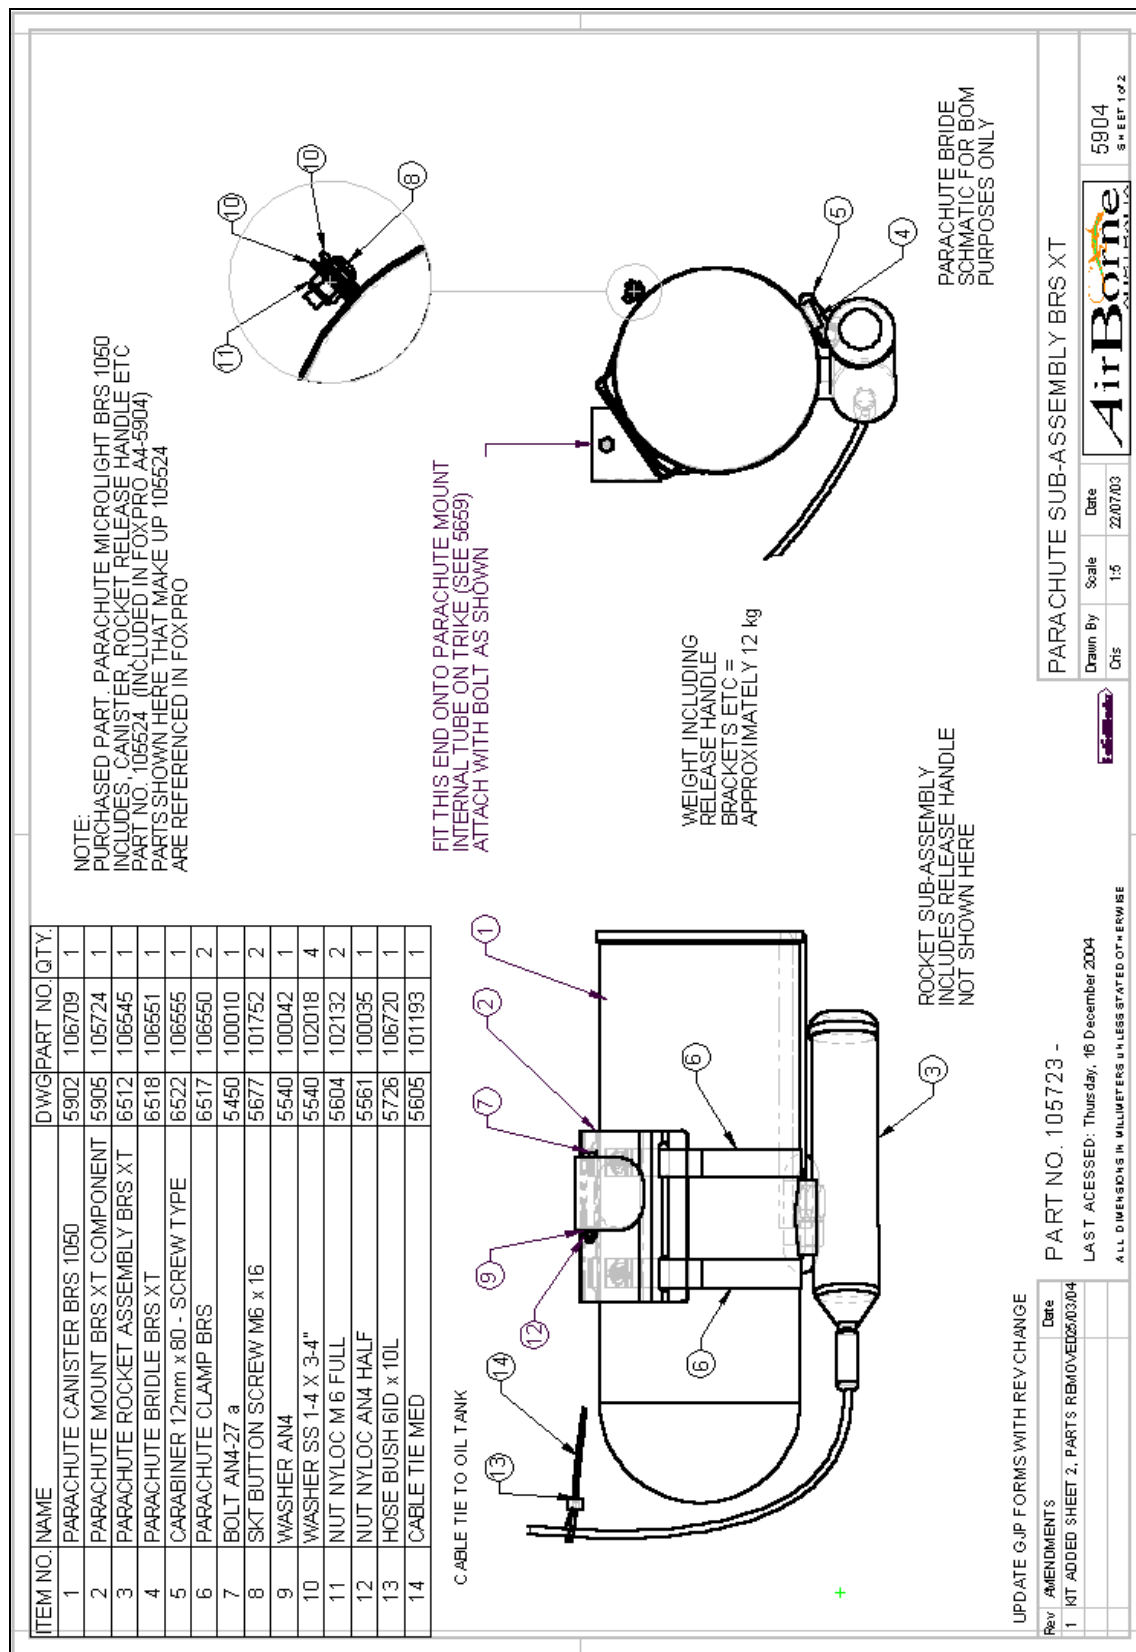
Parachute Assembly. Drawing A4-5404 (Sheet 1)
